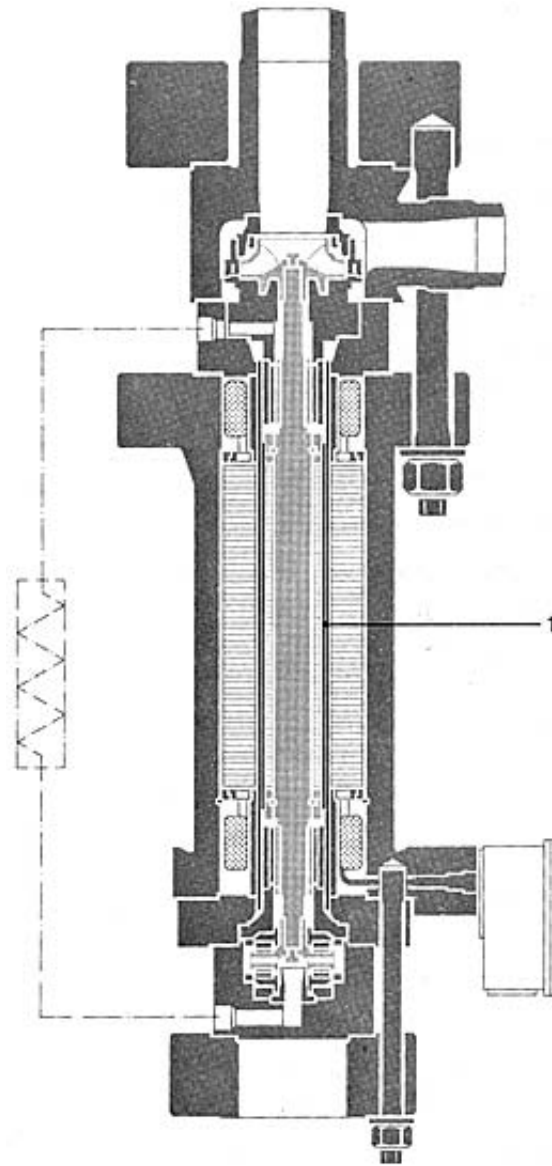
Diagram of a glandless circulating pump with canned motor for high-pressure process engineering 1 can
